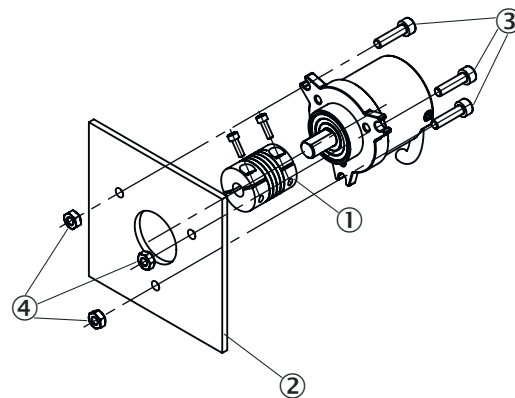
Installing face mount flange 3xM3 via 3 mounting links on the flange side
